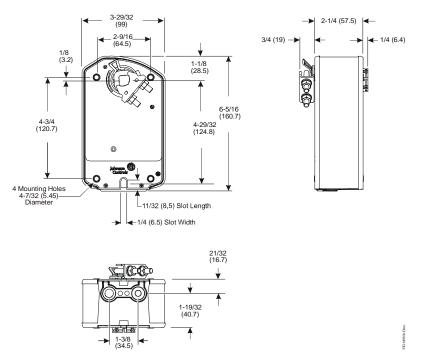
M9208-xxx-x Series Electric Spring Return Actuator Dimensions, in. (mm)
